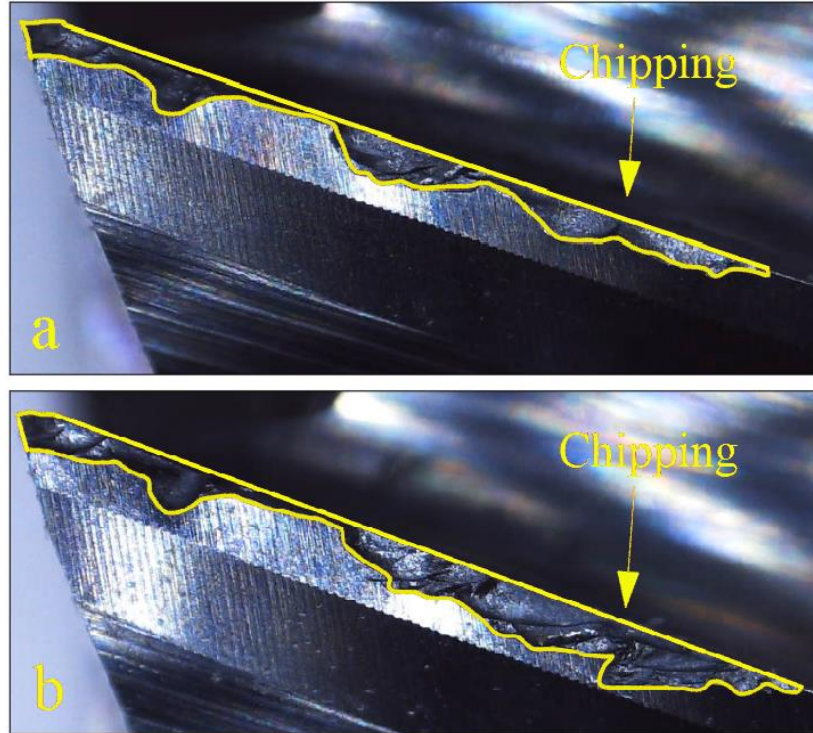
(a) Tool # 7 when cutting distance was 2 inches (b) Tool # 7 when cutting distance was 4 inches
